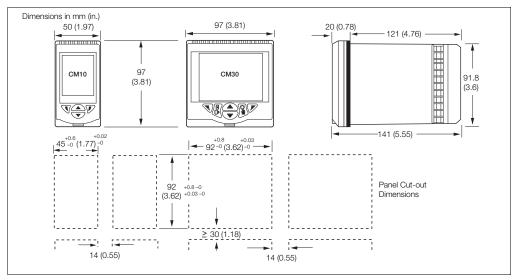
ControlMaster CM10 and CM30 Dimensions
